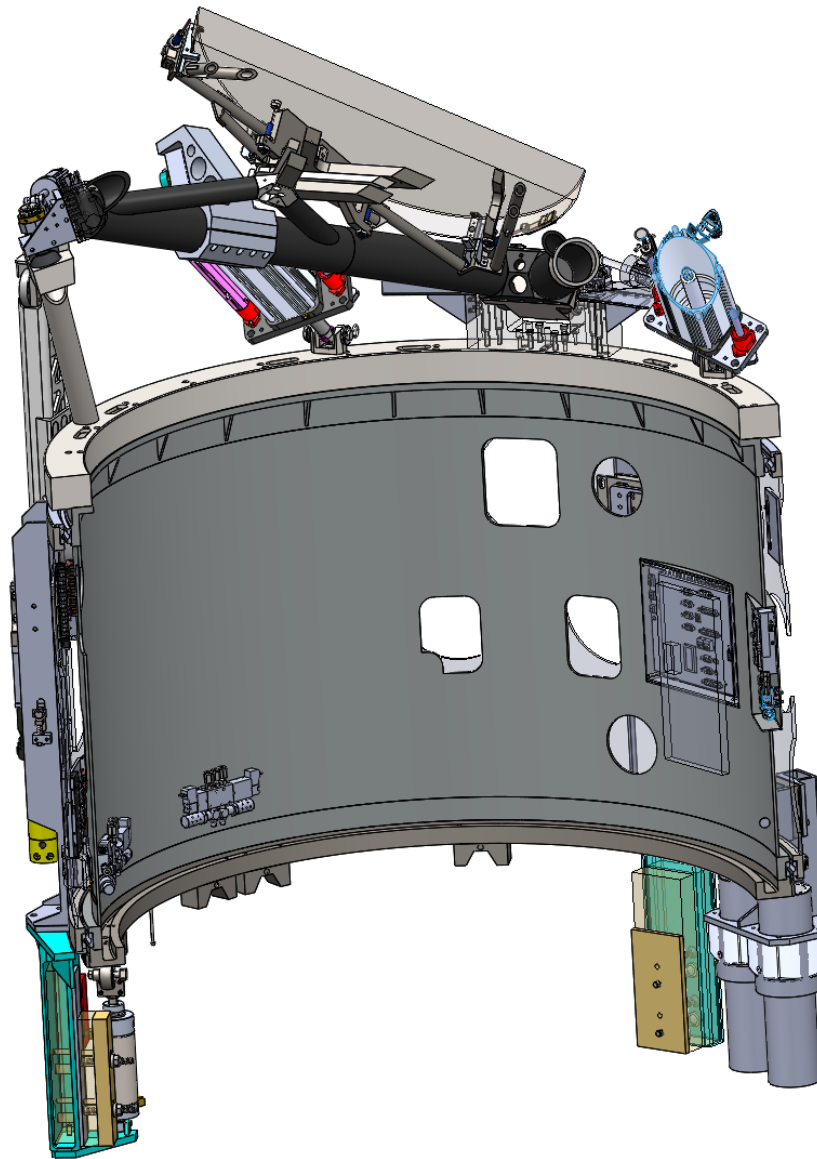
Cross-sectional view of the inner drum. One notes “pockets” for the Galil and RIO mechanisms and fixtures for air supply and electric connectivity.
